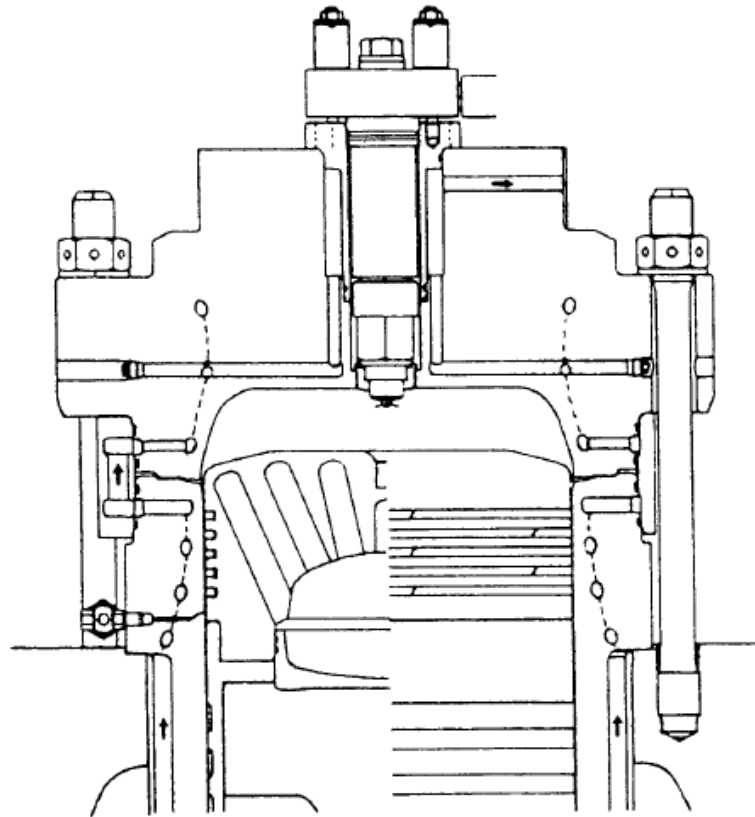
Combustion chamber and piston cutaway view of large direct-injection diesel engine.
